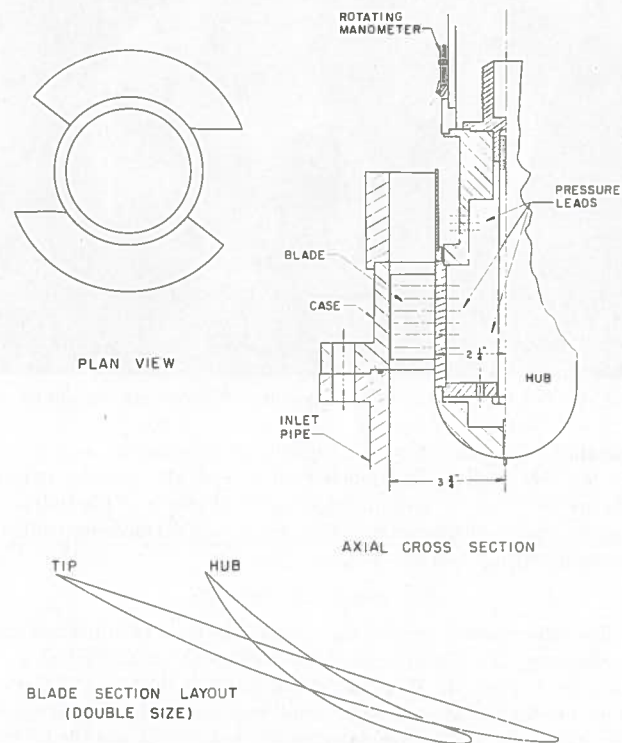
(a) VIEWS OF TEST PUMP AND BLADES
